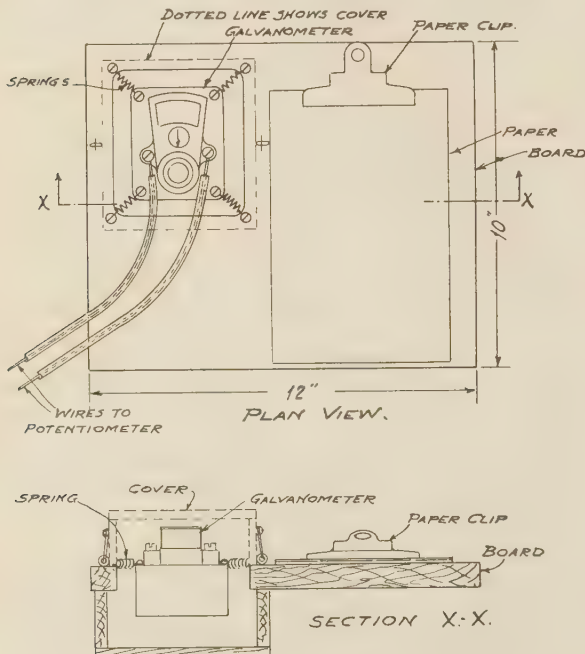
GALVANOMETER MOUNTING OF DATA BOARD
